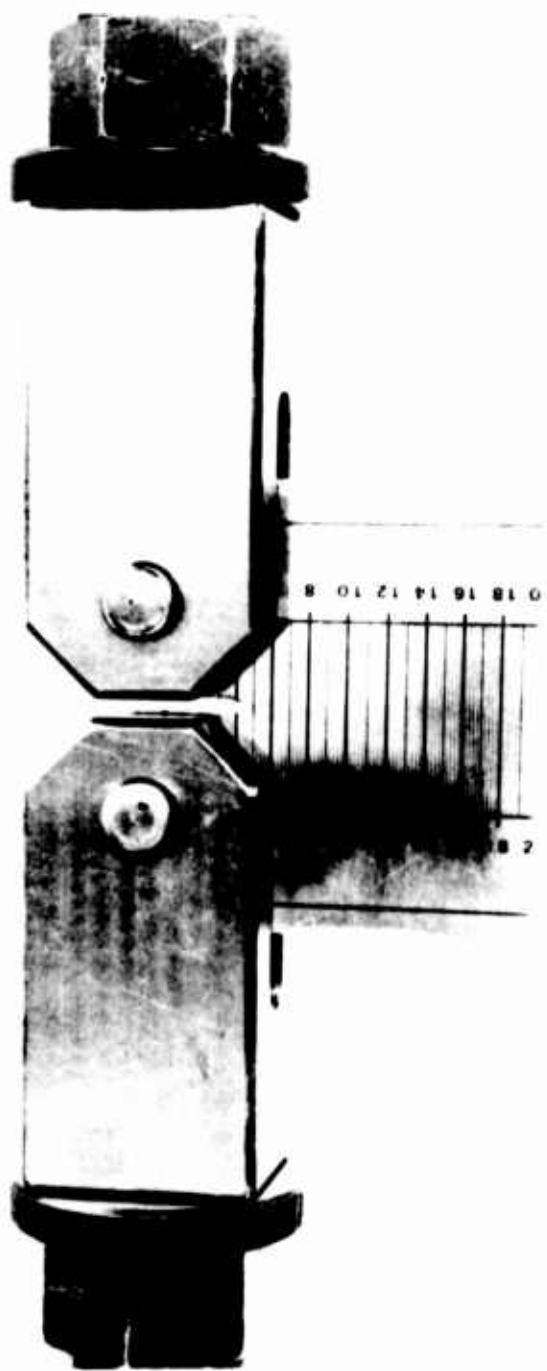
Compact Crack Propagation Specimen in Fatigue Machine
